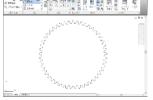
CAD example (2D) Fig. 35.25 CAD example (3D)
